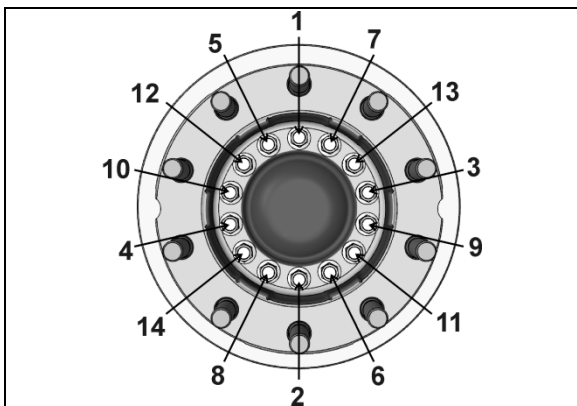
HUB FLANGE HEX CAP SCREW TIGHTENING SEQUENCE
